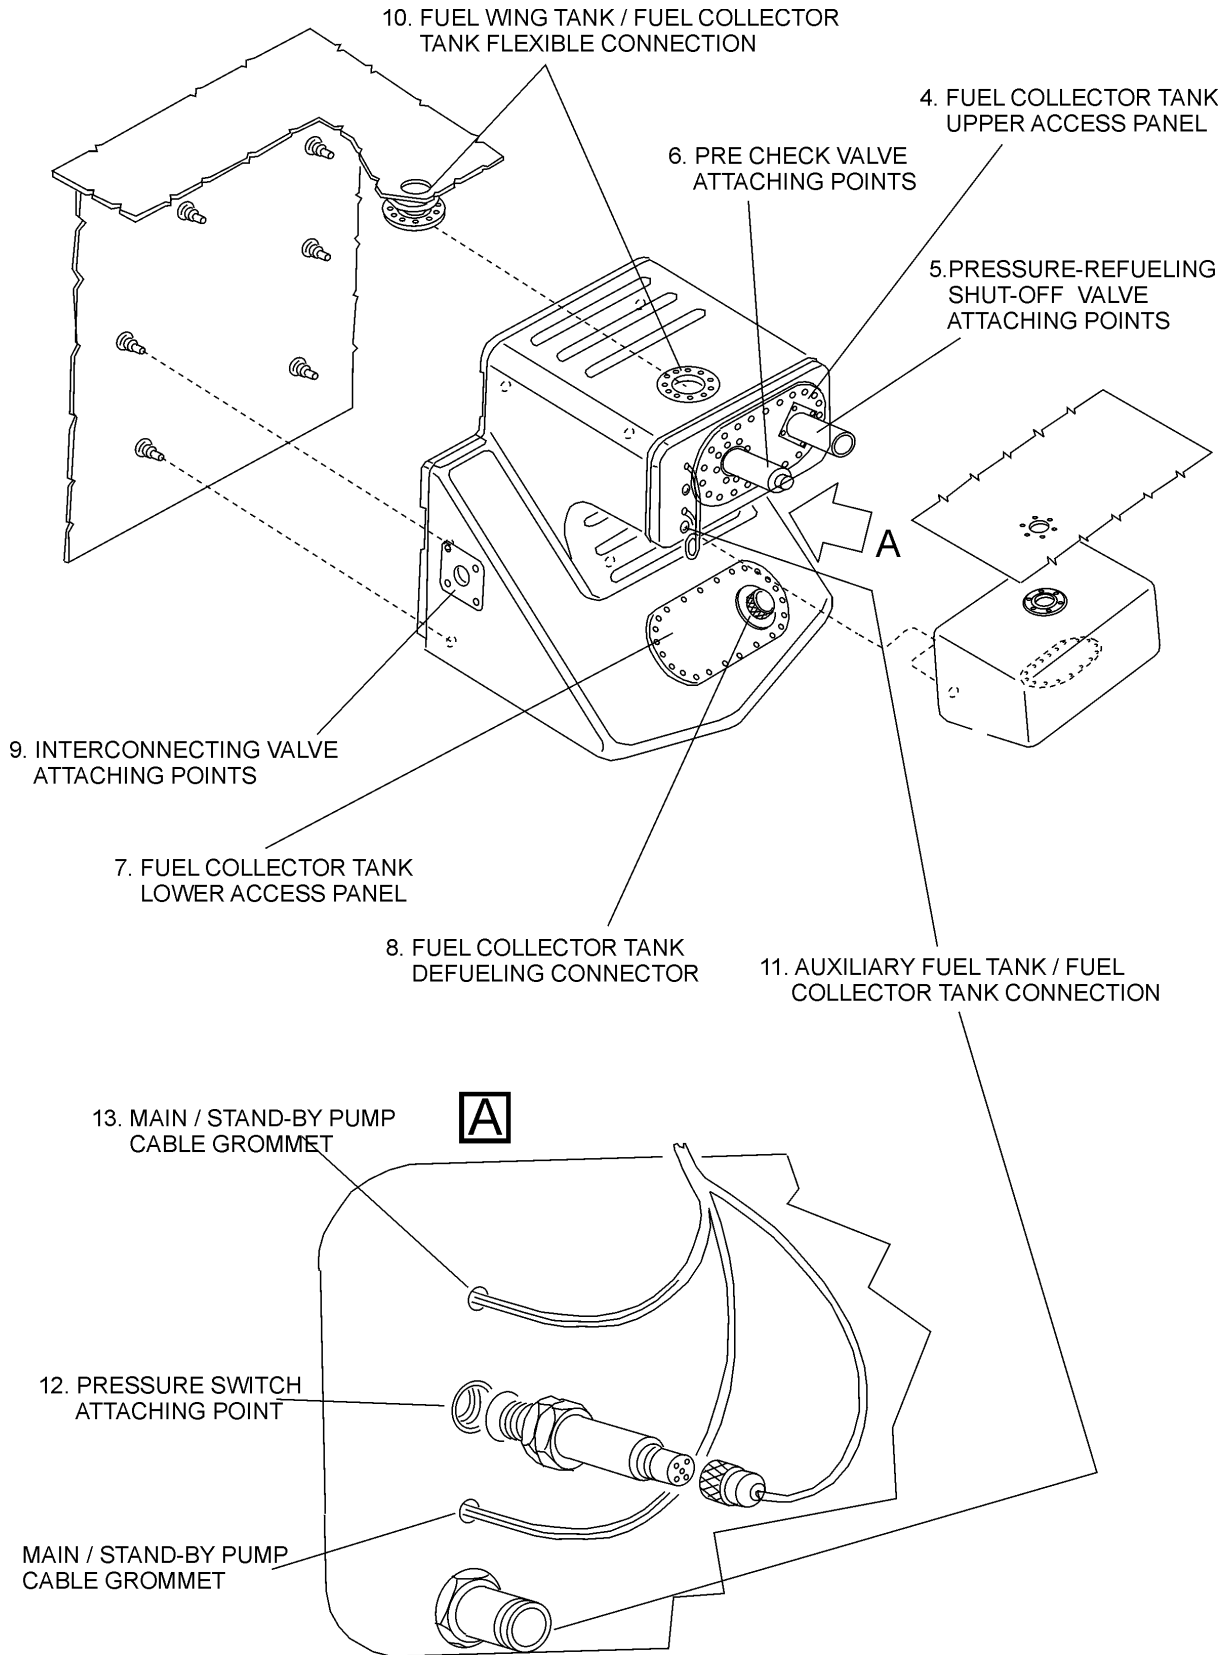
Fuel Tanks Access Panels and Components - Leakage Check (Sheet 2 of 6)
